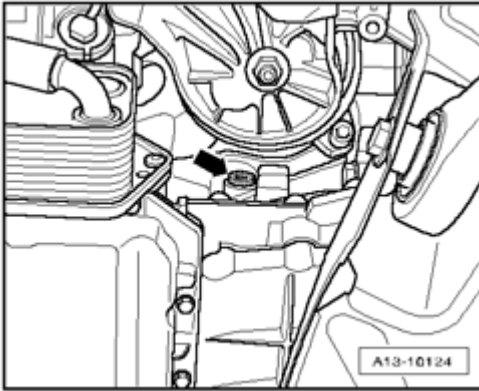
Removing/Installing Sealing Plug From Cylinder Block
